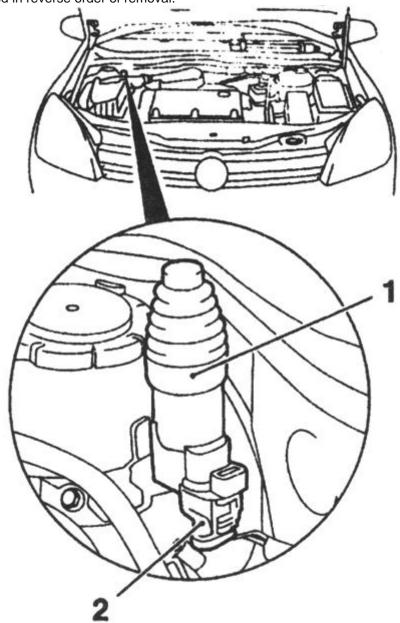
Connector wiring dates Chica - switch bonnet Car Opel Astra:
